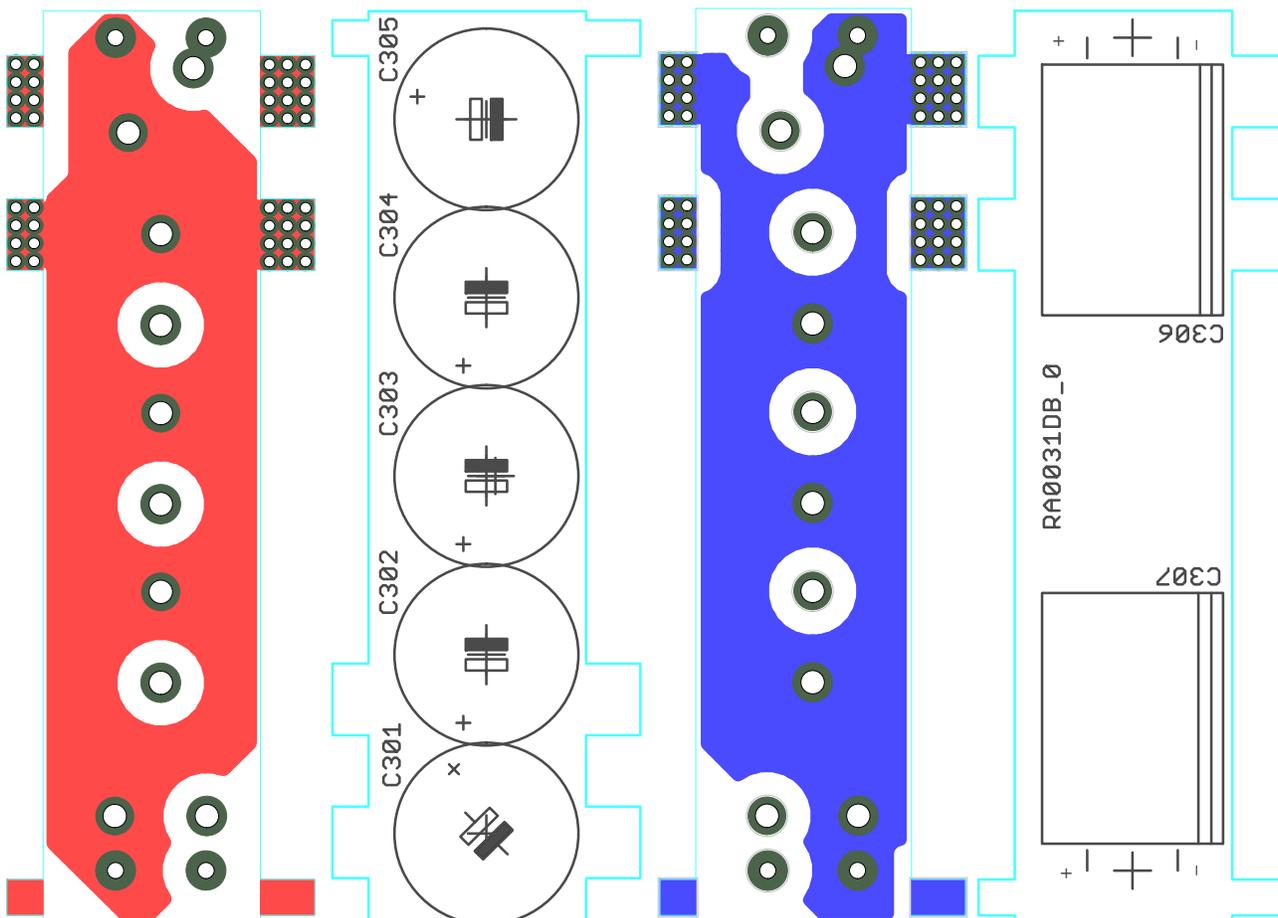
Top / Bottom Layer PCB Layout and Assembly Plan of CBULK MODULE MOD102
